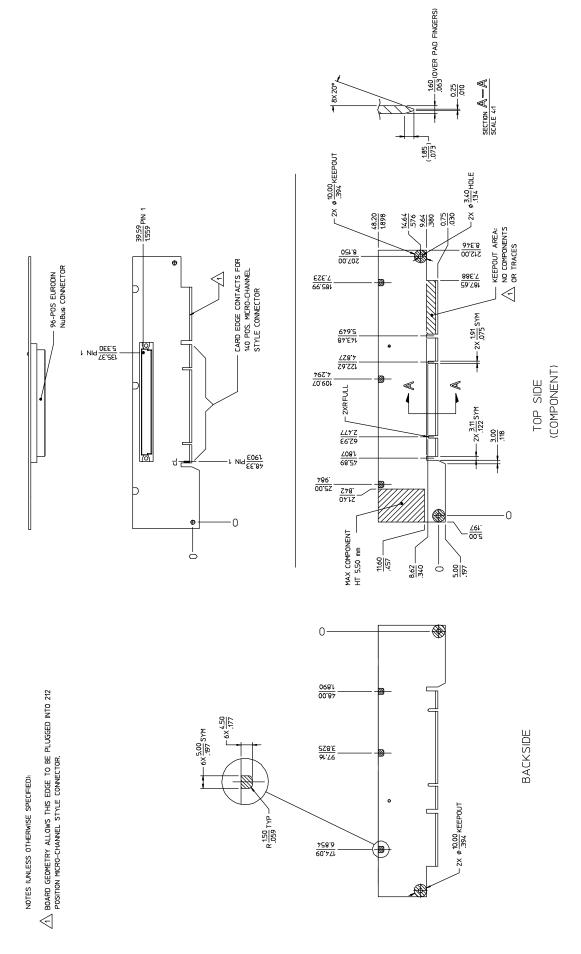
NuBus adaptor card for the Macintosh Centris 660Av 630-0450-12
